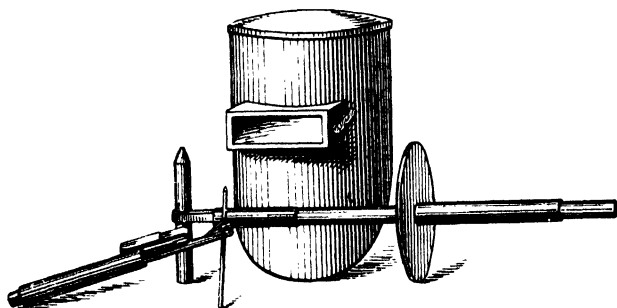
HEAD SHIELD AND ELECTRODE HOLDER.
